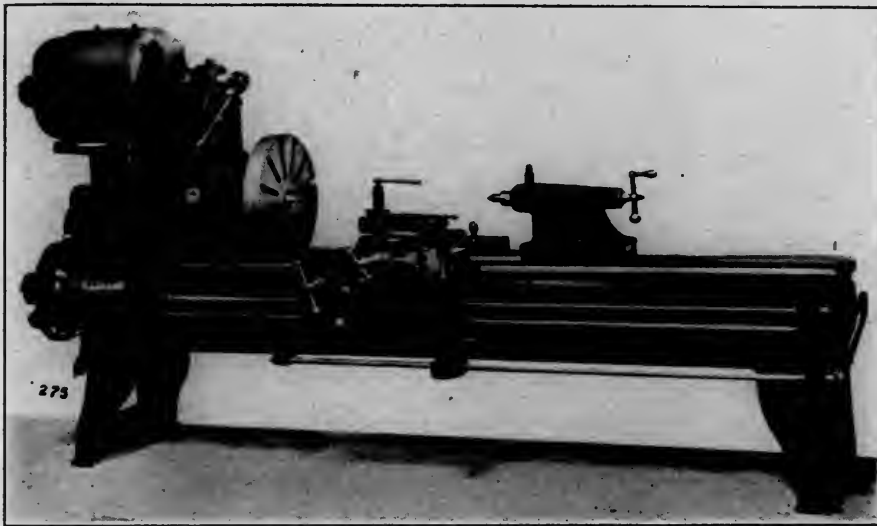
APPLICATION OF VARIABLE SPEED MOTOR TO 22-INCH LATHE.
